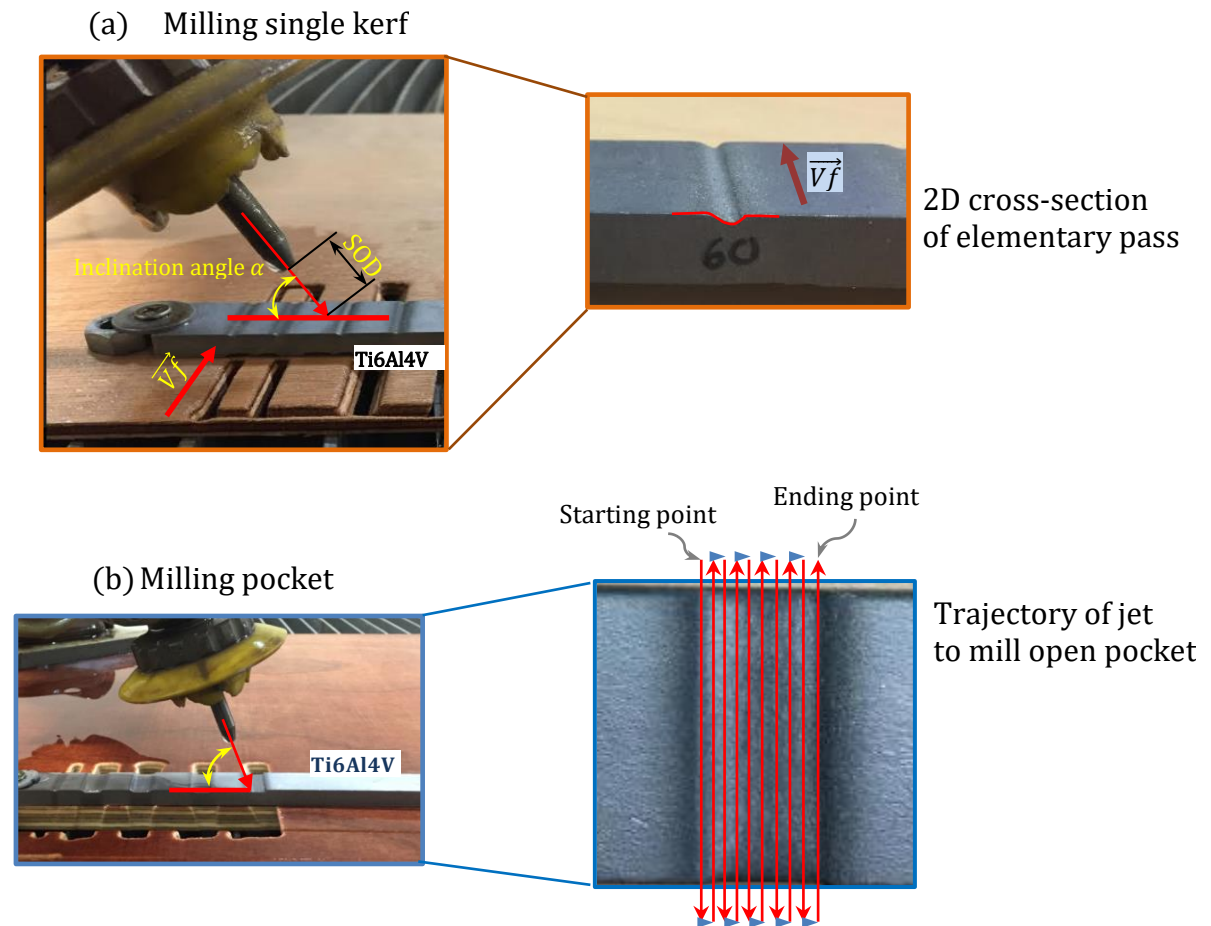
Experimental setup employed for AWJ machining of Ti6Al4V
